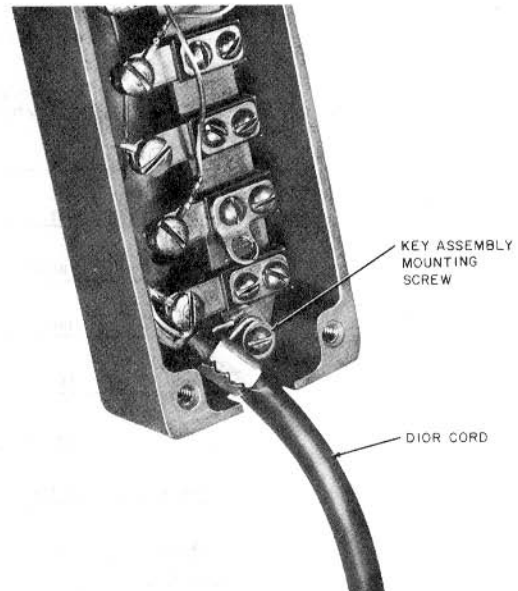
Fastening D10R-87 Cord in 549C (MD) Keys
